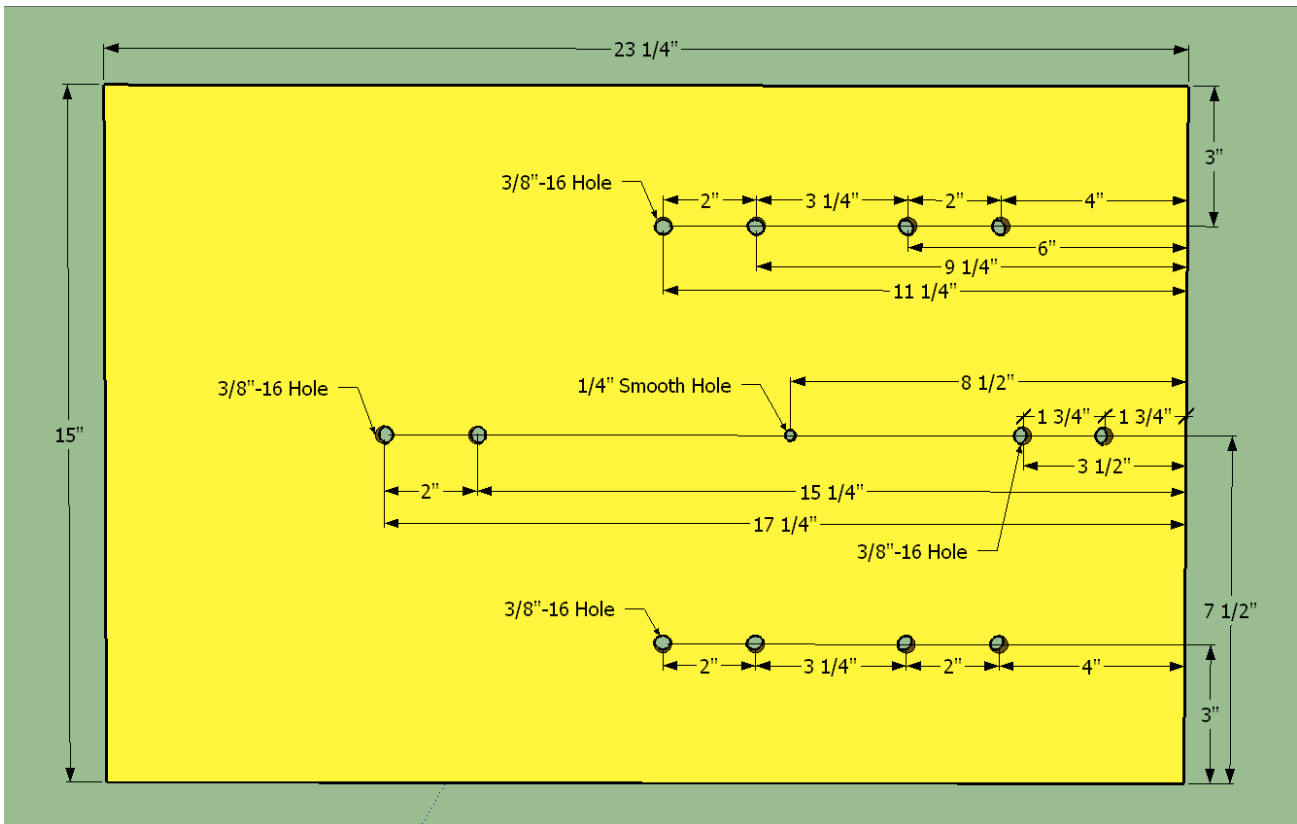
Base Plate Holes Locations- Sample Holder of Rectangular Specimens.
